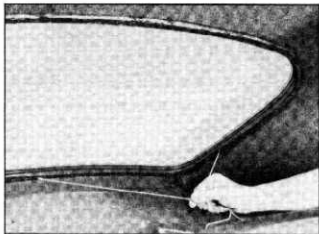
Pull Inner Lip of Channel Over Pinch-Weld
